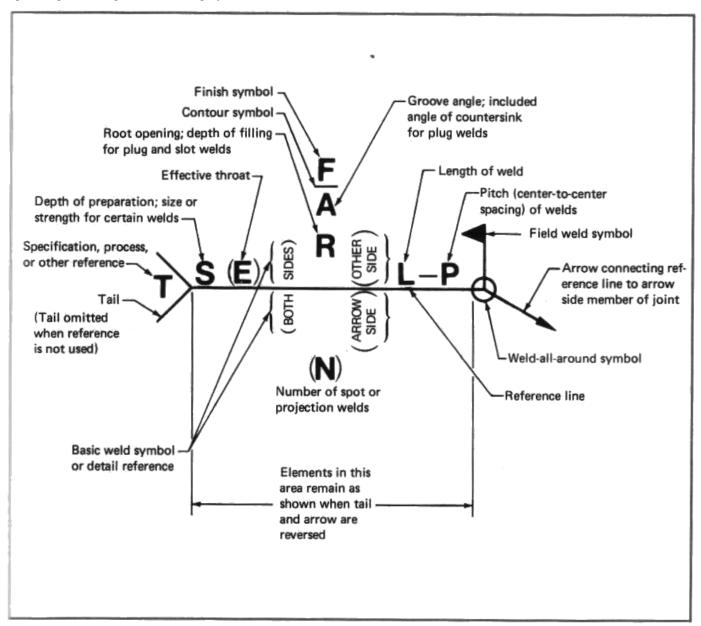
This complete symbol includes all possible elements of the welding symbol. (Courtesy American Welding Society.)
